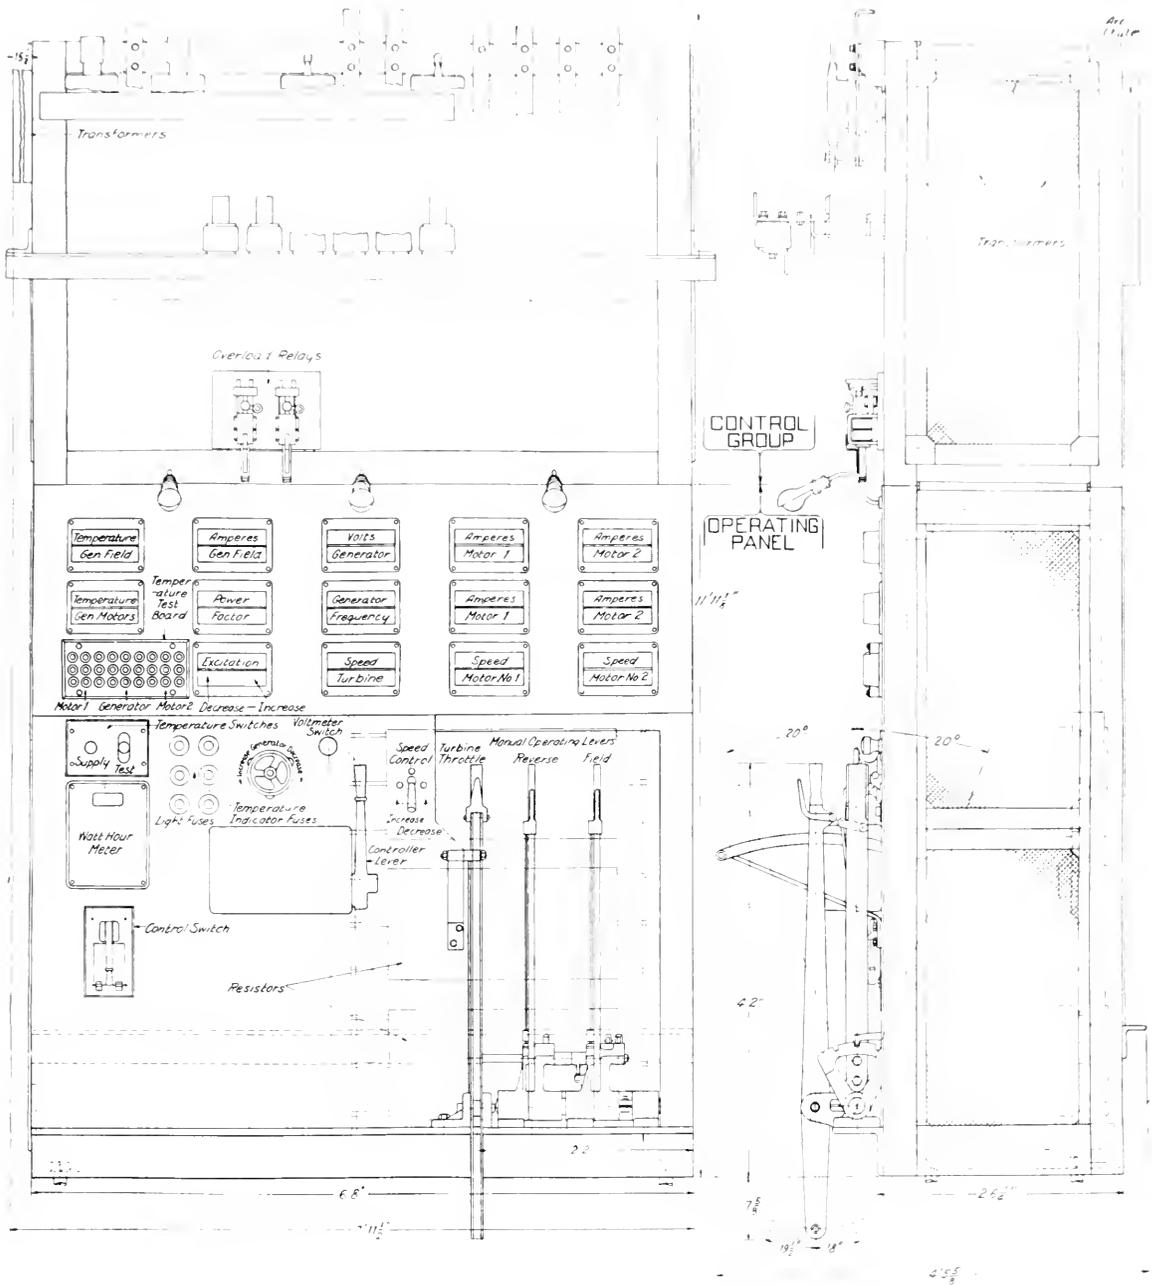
Outline Drawing showing the Arrangement of the Operating Panel and Control Group
